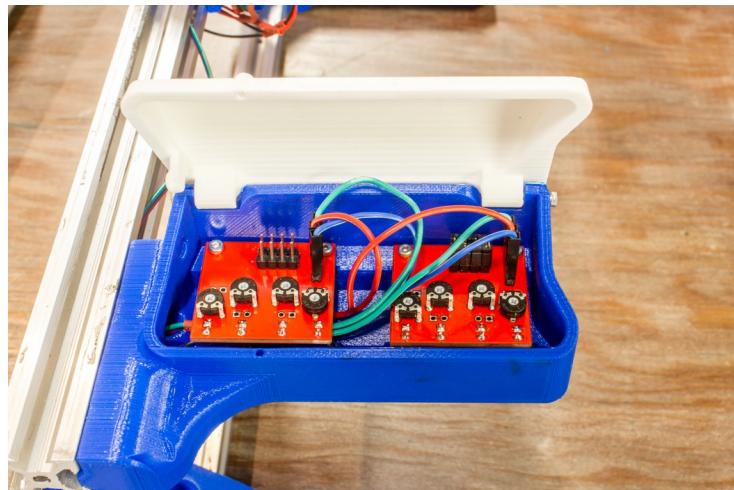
Boards wired up and jumpers installed on board on right – board on left still needs jumpers installed
